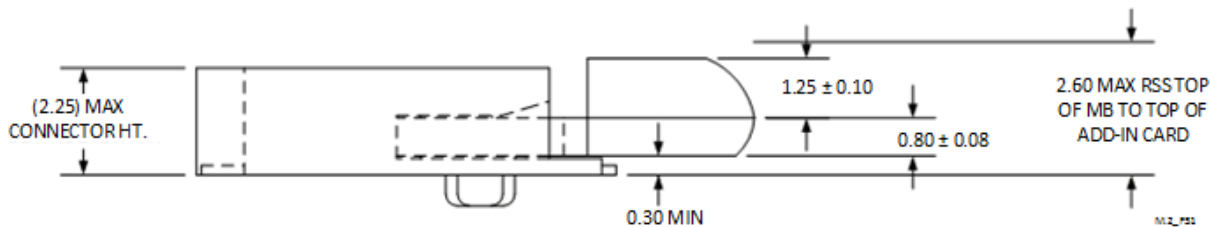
H2.3-S2 - Stack-up Top Mount Single-sided Add-in Card for 1.35 Maximum Component Height
